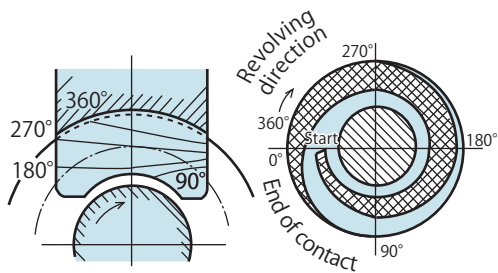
Engagement for Bevel gear with Crowning {Gleason Company, INSTALLATION OF BEVEL GEARS (1965)}
